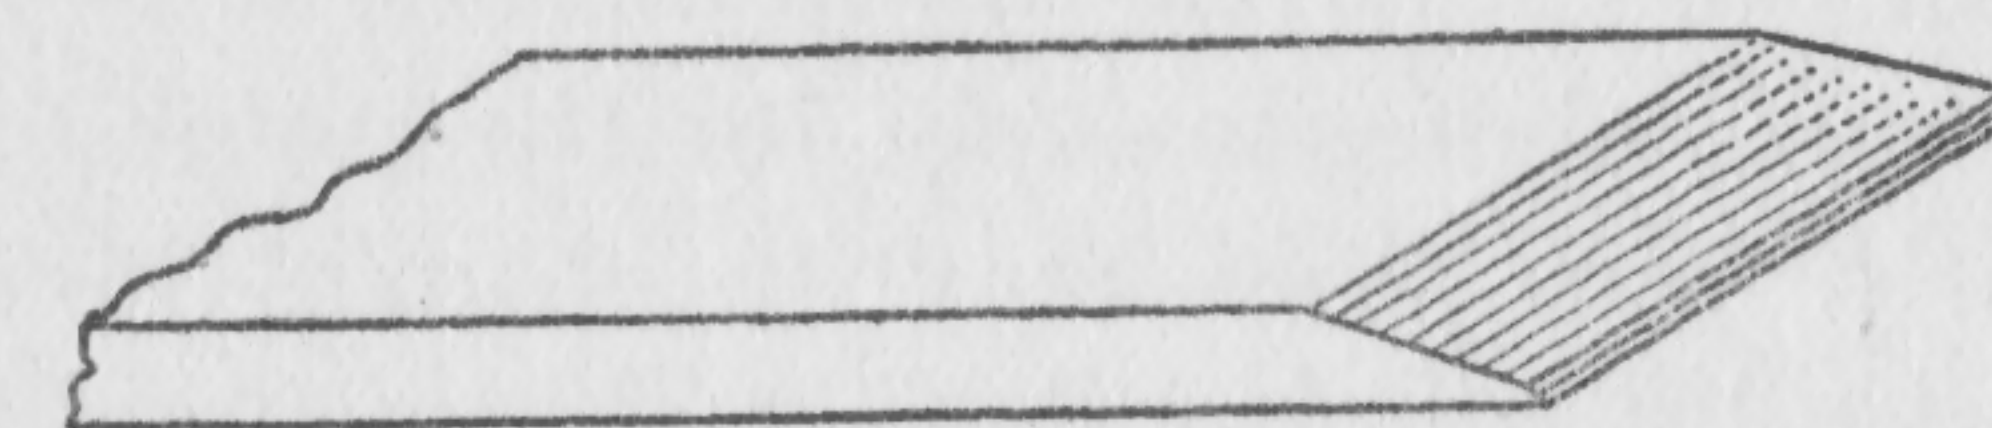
The edge of a chisel or plane cutter consists of a double bevel. The lesser angle is made by grinding, the final cutting edge by honing.
